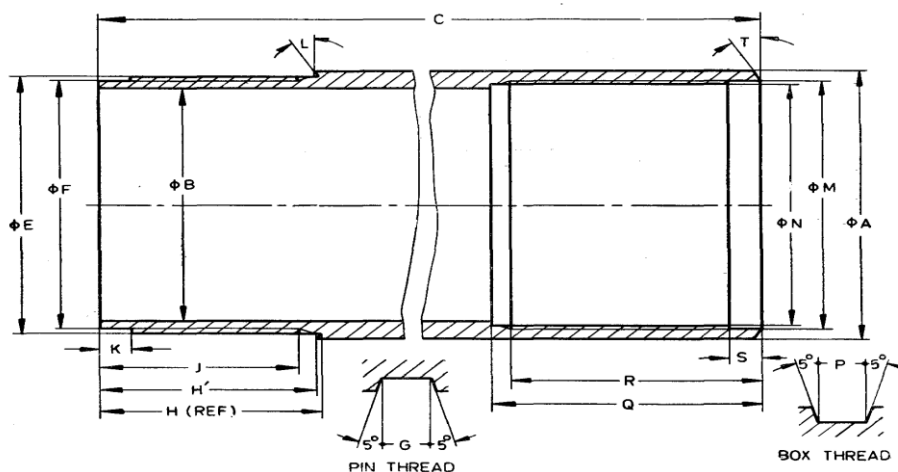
'WF' DESIGN DOUBLE TUBE CORE BARREL — OUTER TUBE
